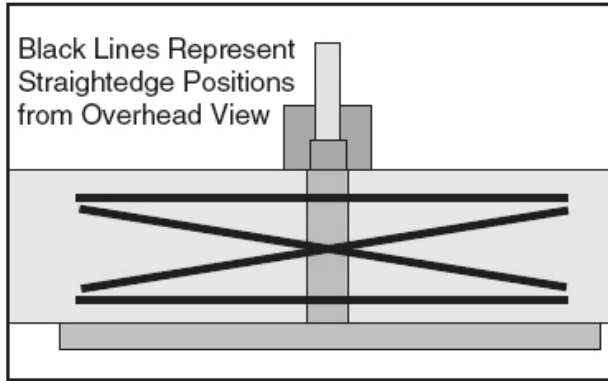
Straightedge positions for checking infeed/outfeed table parallelism.
